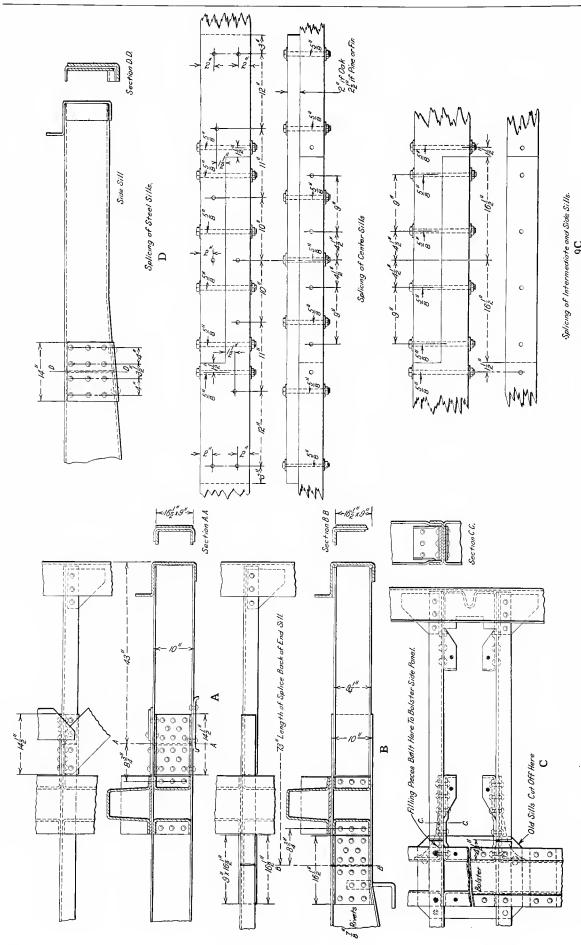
M. C. B. Standard Splicing for Steel and Wooden Sills. (M. C. B. Sheet 28.)
